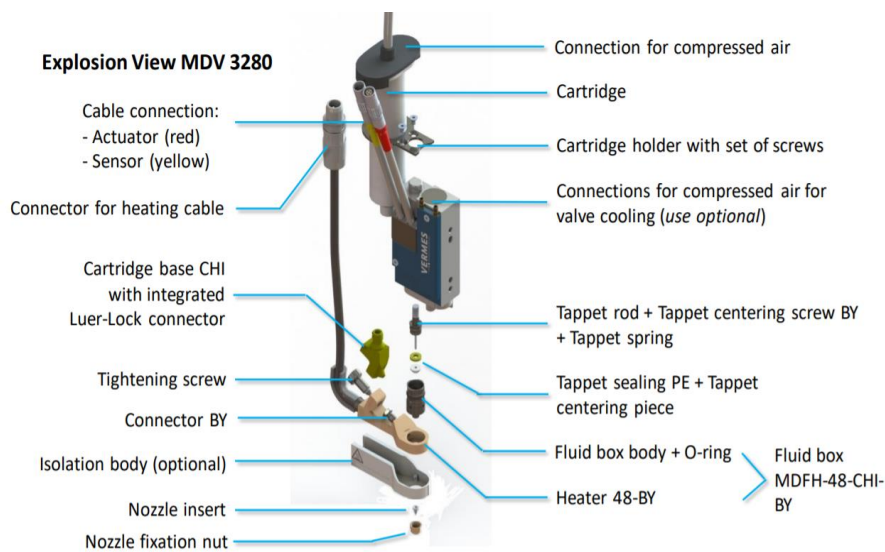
Exploded view of the Vermes micro dispenser's parts [39].
